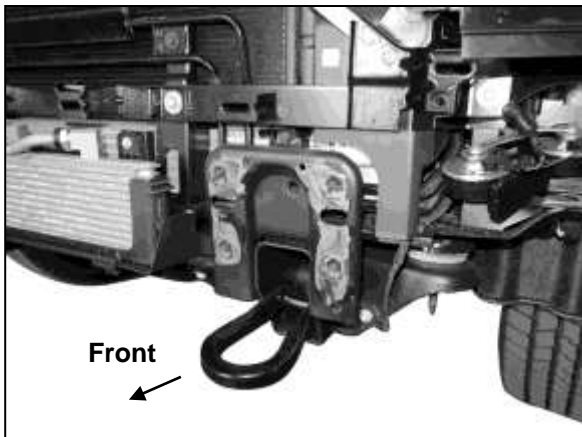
Remove bumper supports attaching outer end of bumper to frame (Driver/left side pictured)
